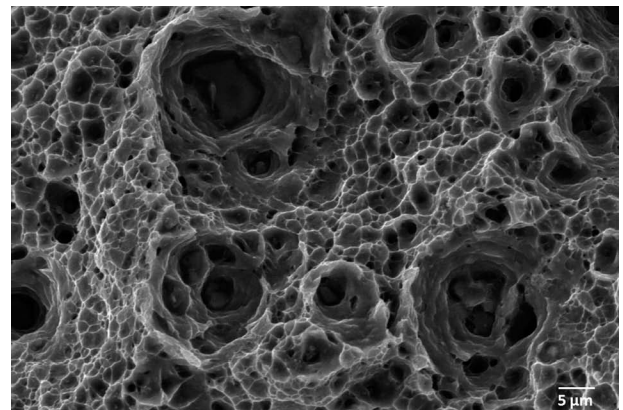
Fracture surface of a room temperature tensile-tested V65 (equivalent to AA 2014) wire rod rolled at 350°C. Note fine equiaxed dimples
